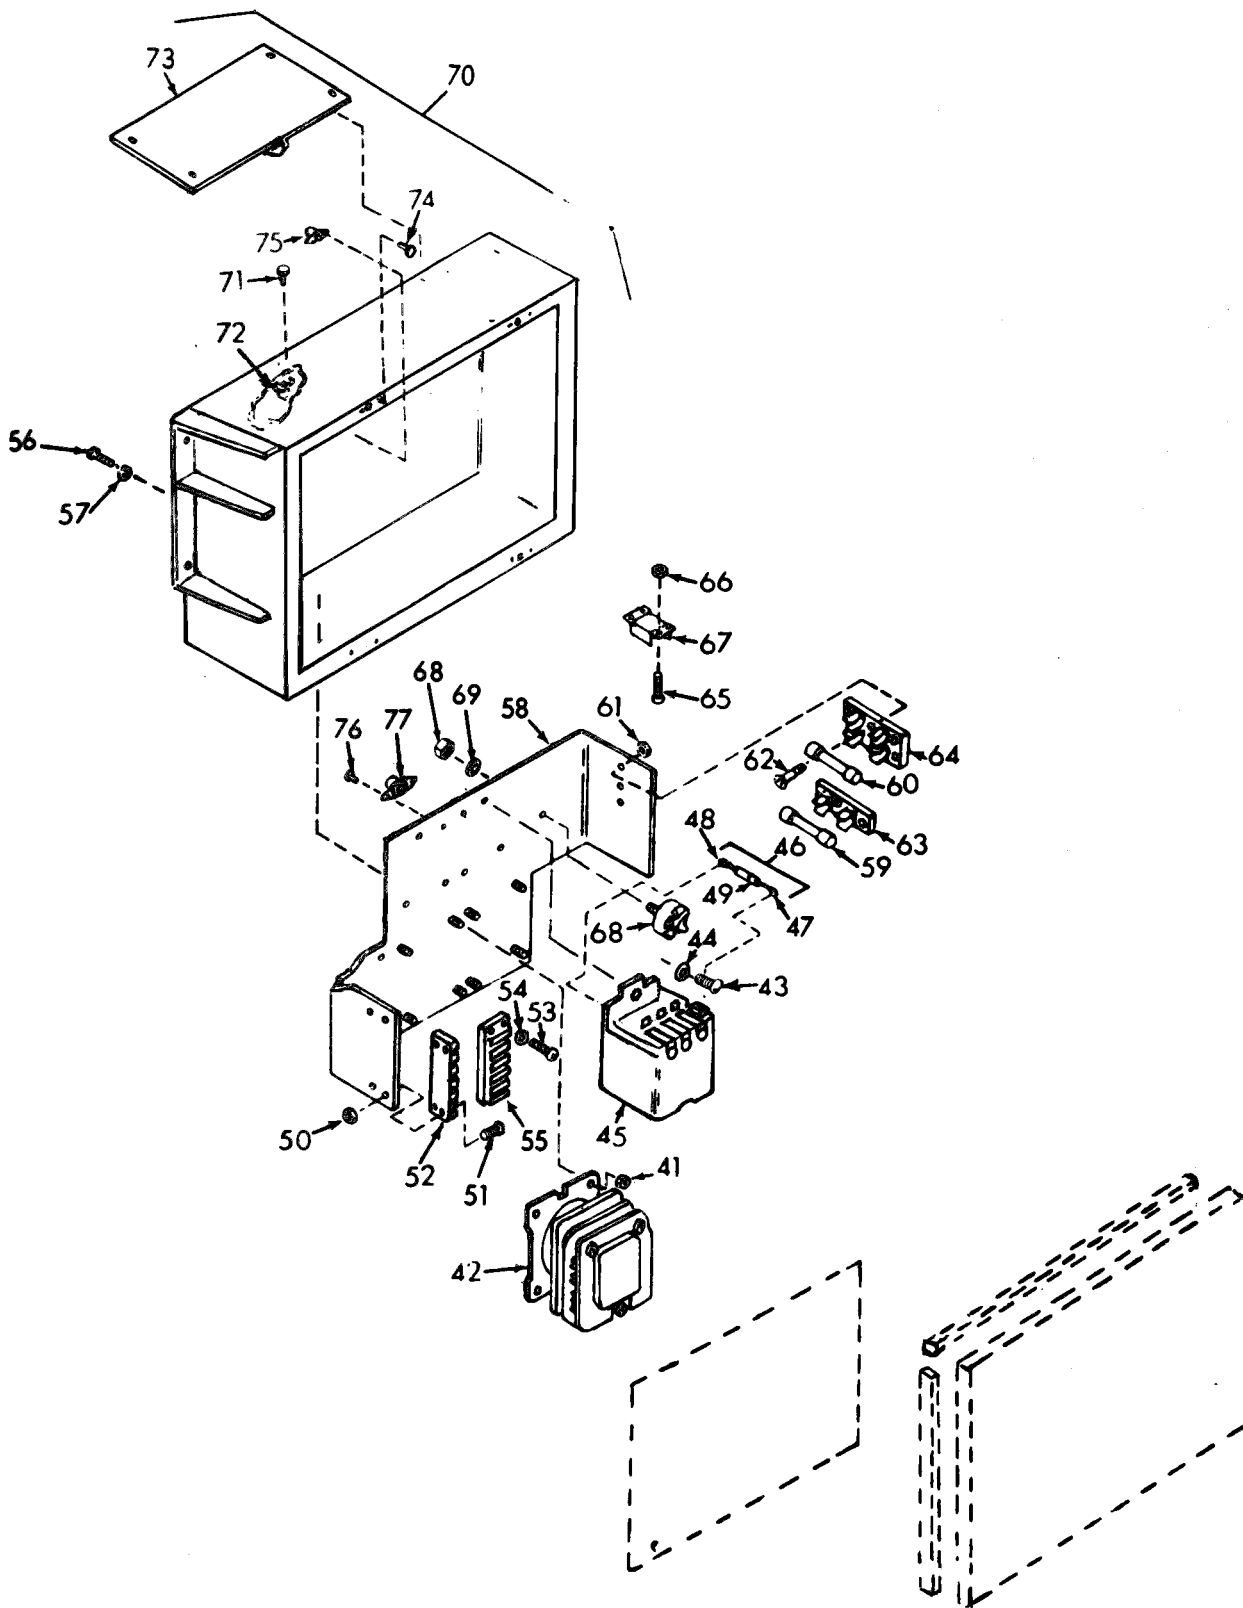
Junction Box Assembly (Sheet 2 of 3)
